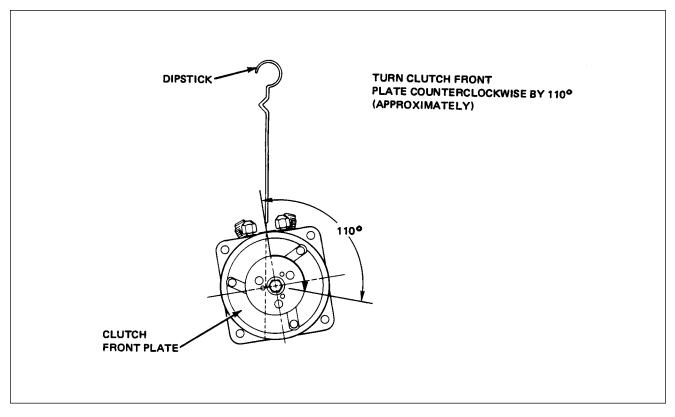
Rotation of Clutch Front Plate (Sankyo Compressor Oil Check)
